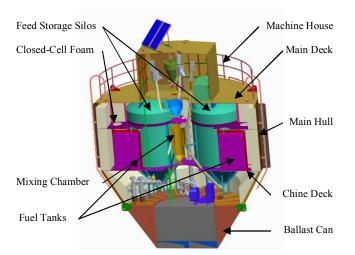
Completed 20-ton buoy design sowing cross-section to view major internal components.
